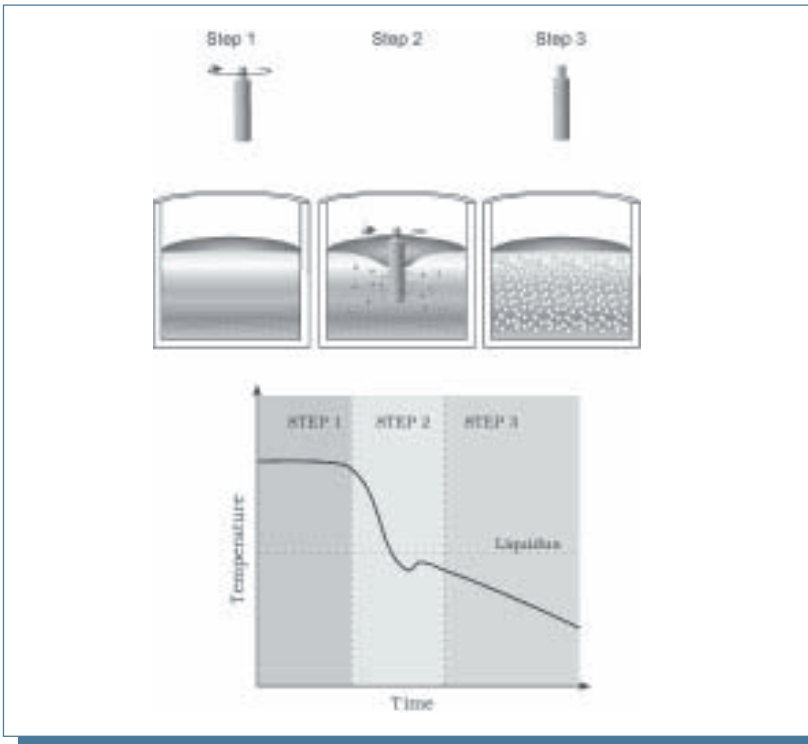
Schematic of the SSR™ process. (1) Molten alloy is held above the liquidus temperature. (2) A rotating, cool rod is descended into the melt, initiating solidification. (3) The rotating rod is removed, and the quiescent melt is cooled to the desired forming temperature.
